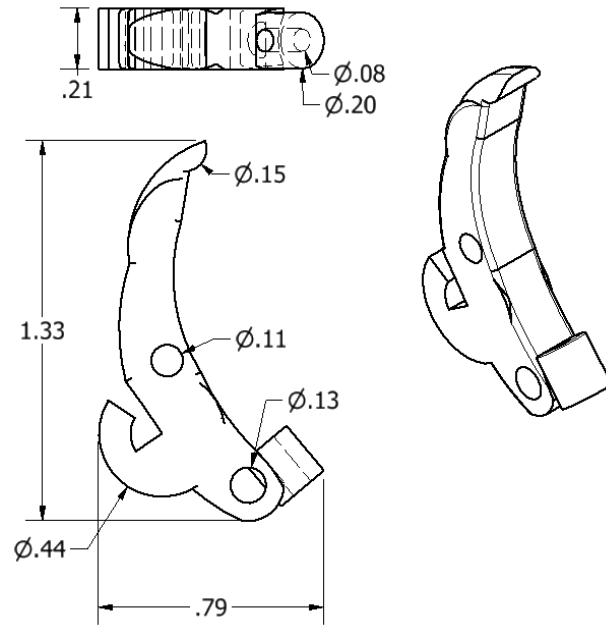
Long gripper for Mark 1 grabber. Dimensions in inches.
